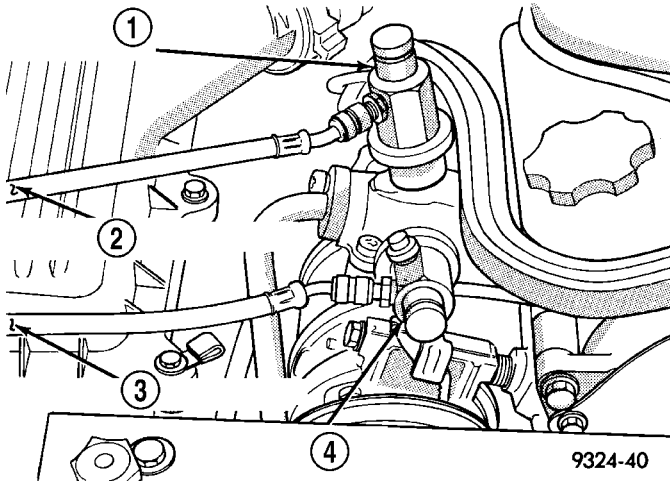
GAUGE SET OR REFRIGERANT RECOVERY MACHINE HOOKUP (3.2 / 3.5L)
